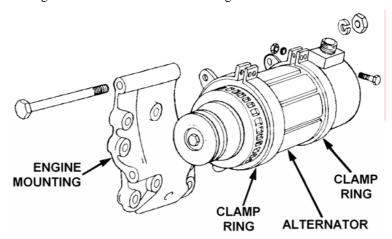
Auxiliary Alternator Clamp Rings and Engine Mount Arrangement
